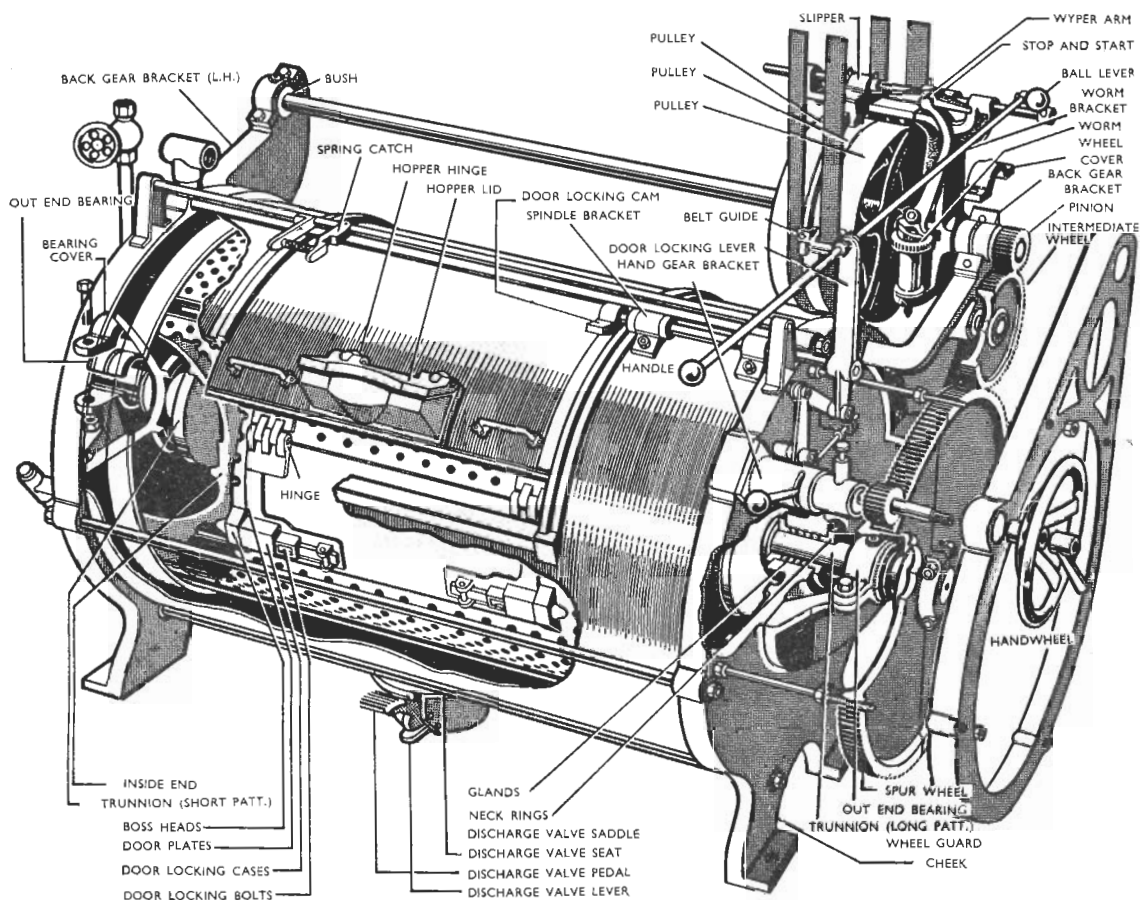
Arrangement of Ritchie No. 2 JCHH belt driven washing machine.
